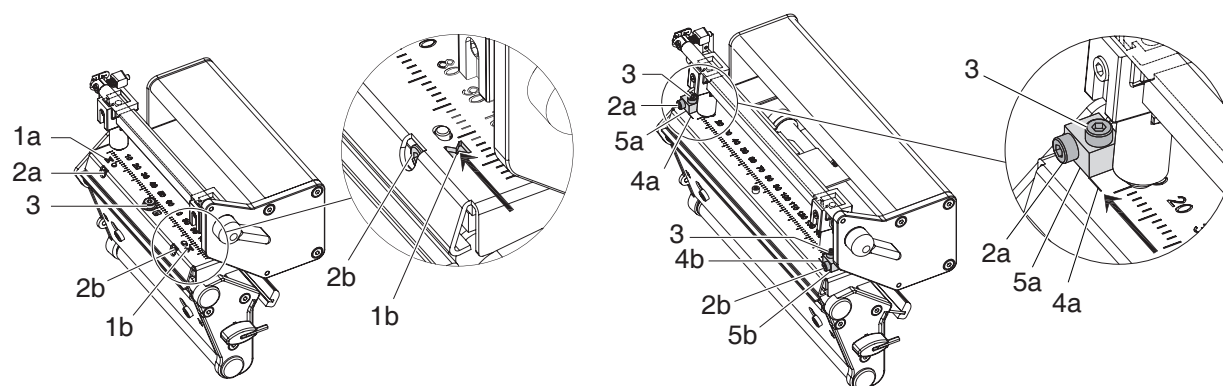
Adjusting the printhead position (left side A2+, A4+, A4.3+ / right side A6+, A8+)
